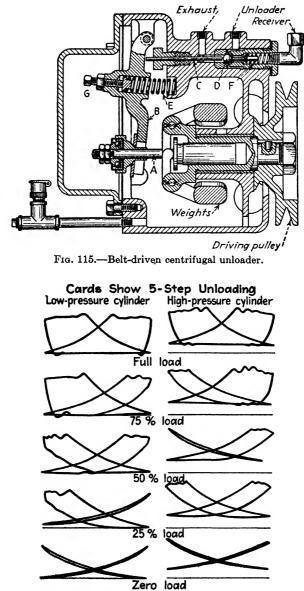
Indicator cards illustrate five-step unloading. (Courtesy of Worthington Pump and Machinery Corp.)
